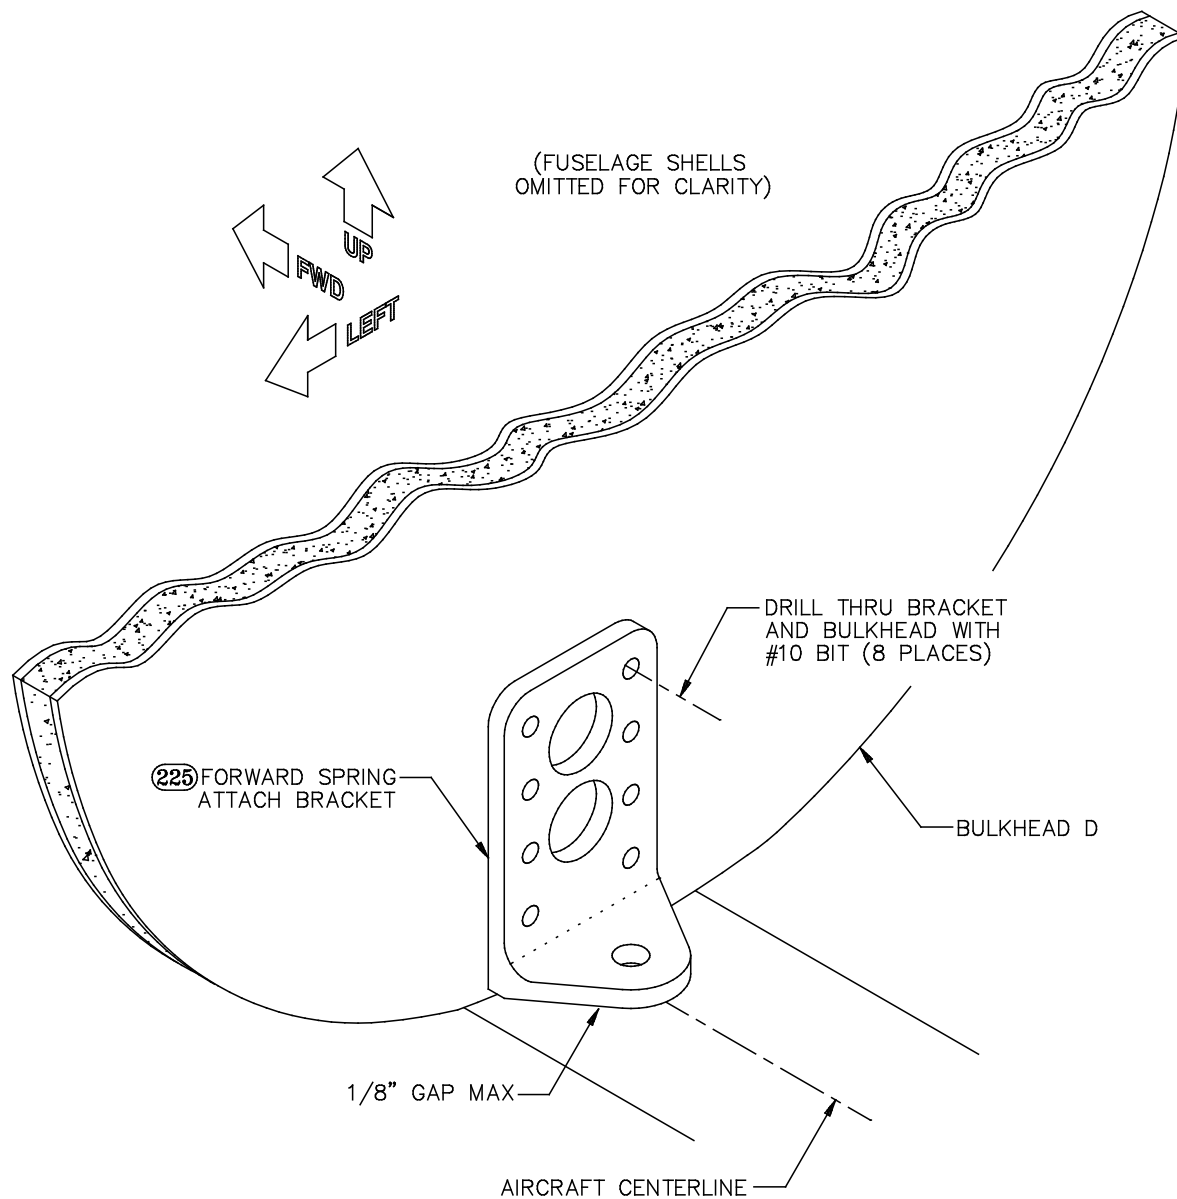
Drilling the Forward Spring Attach Bracket Bolt Holes
